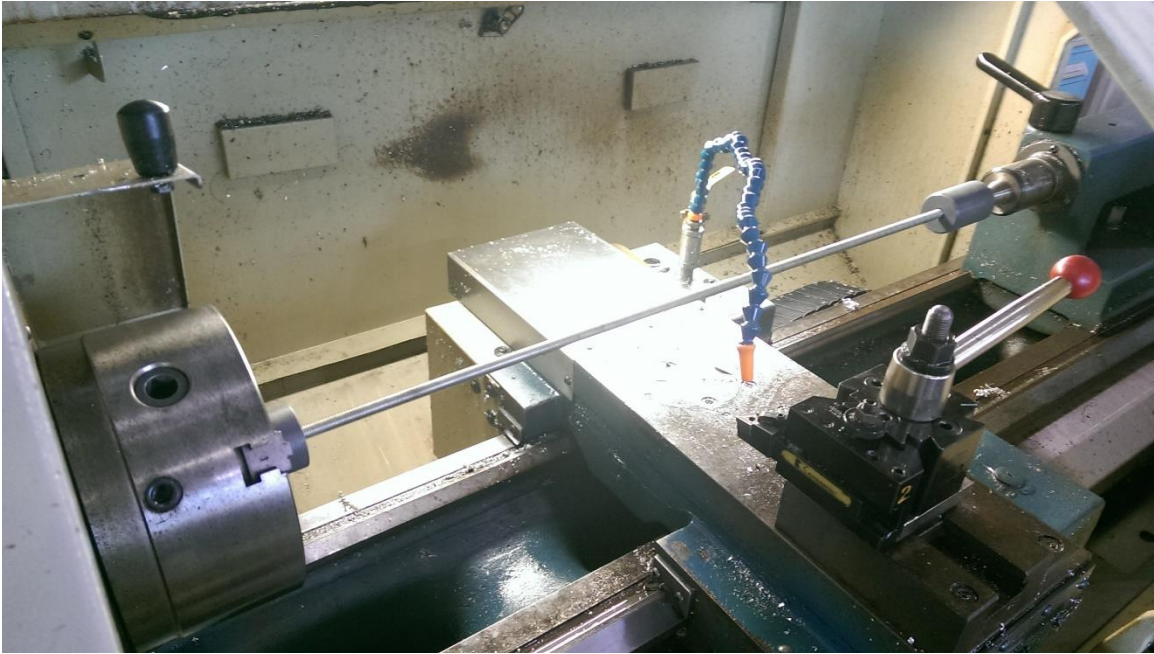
Fixture used to engage live center to support tubular segments while threading.
